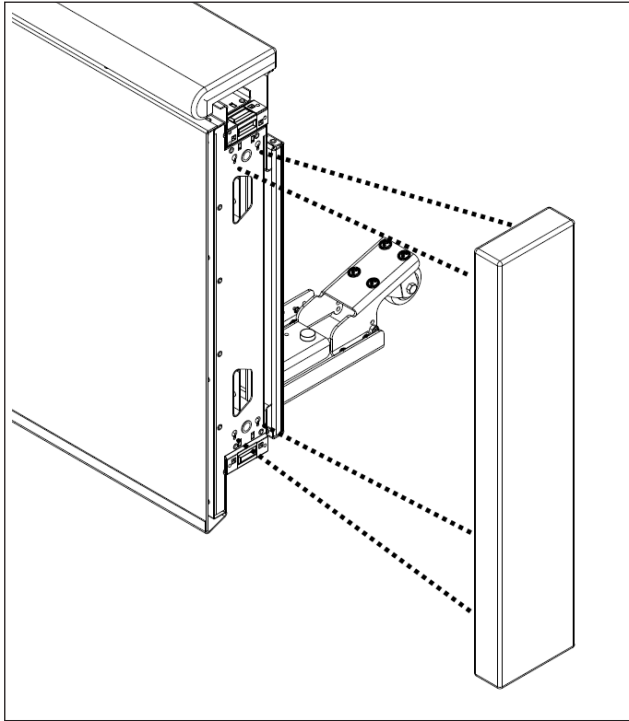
Align End Pad Bolts with Keyhole Cutouts
